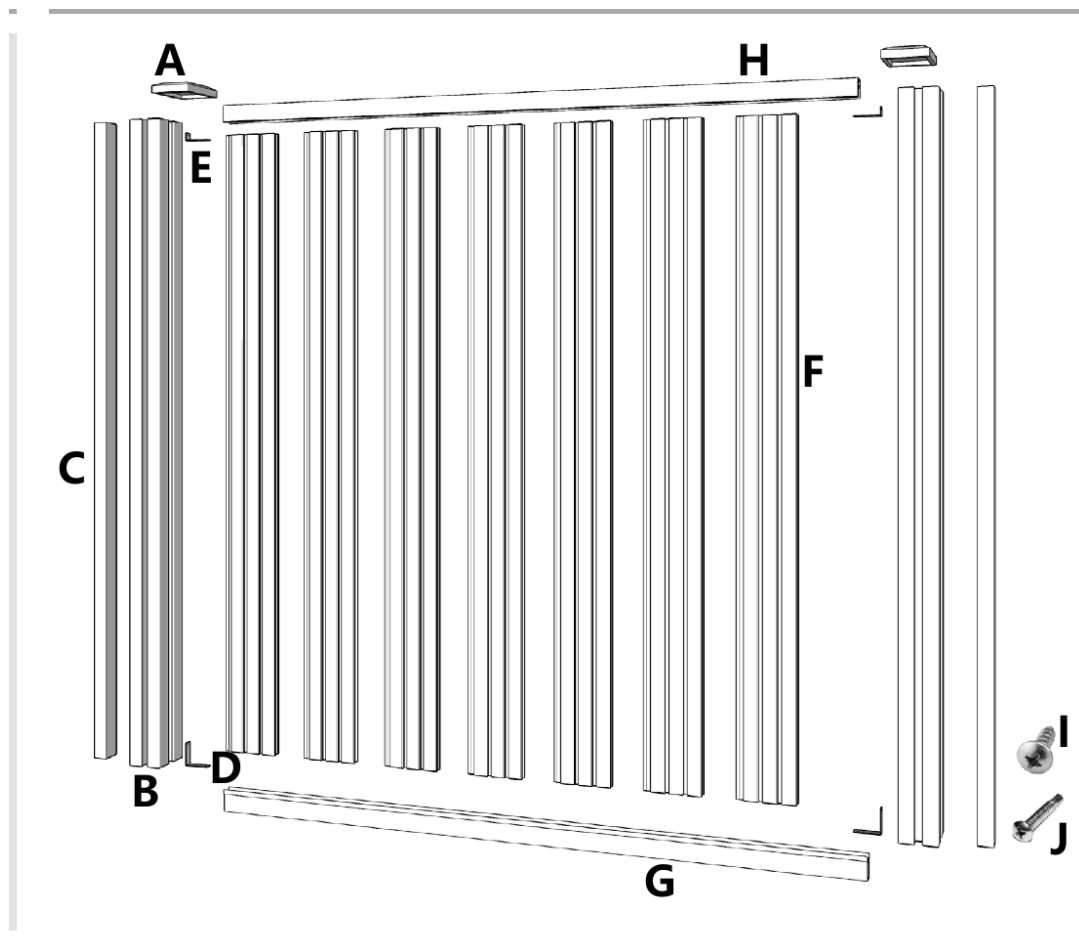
EXPLODED VIEW – FENCE COMPONENTS A-J
